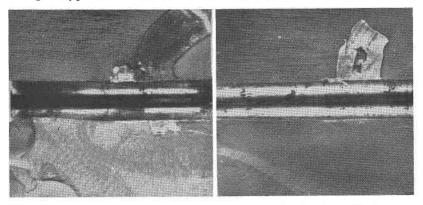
Halves of steel pressure cylinders that cracked showing tissue thin sheets of copper that were extruded into the cracks.
